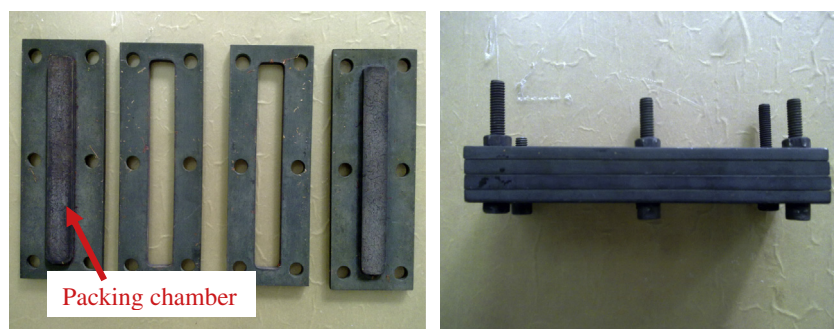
Optical images of the mold pressing equipment with packing chamber for producing the PMFSS.
